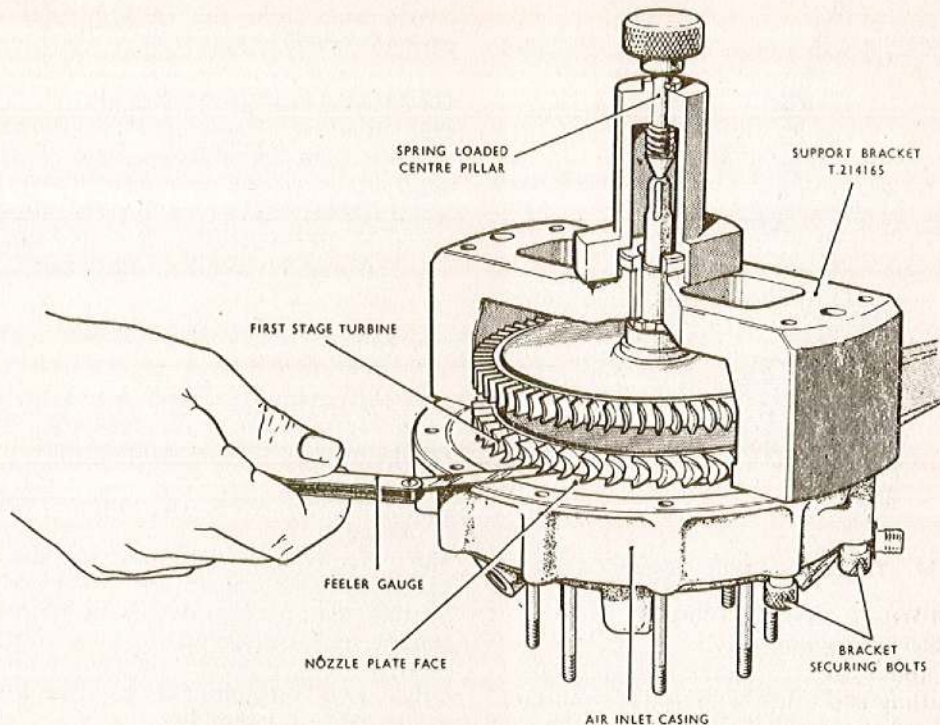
Checking the clearance between the first-stage turbine and the nozzle plate
